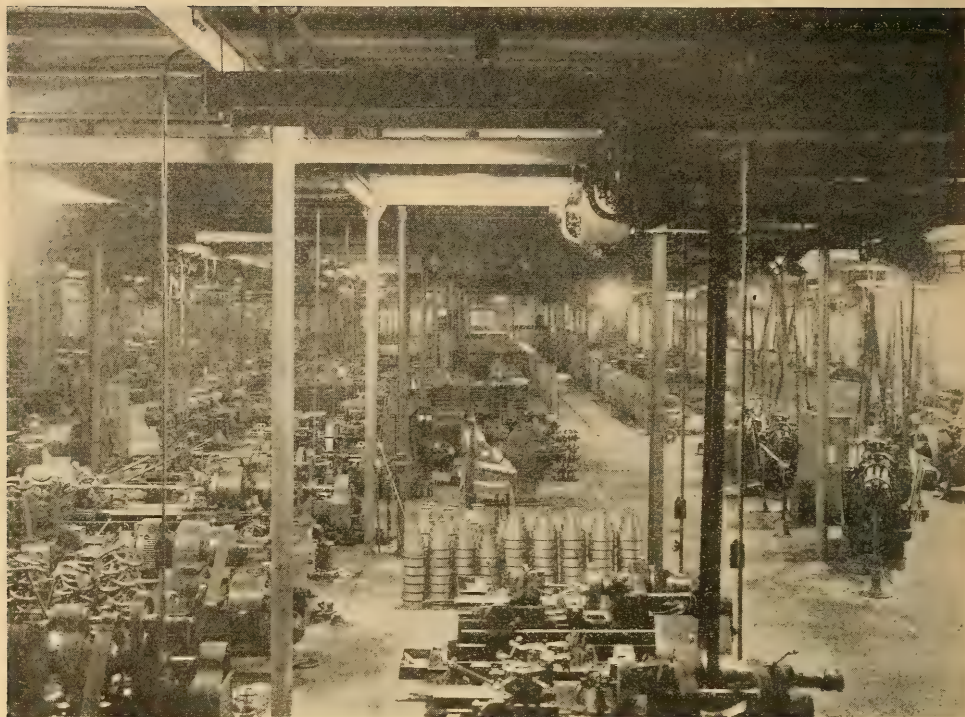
MODERN MACHINE SHOP LIGHTING; THE WHOLE ROOM ILLUMINATED LIKE DAY.
